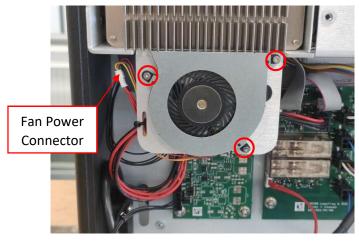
3x (T8 Torx) Fixings that secure PC Fan to Unit.
